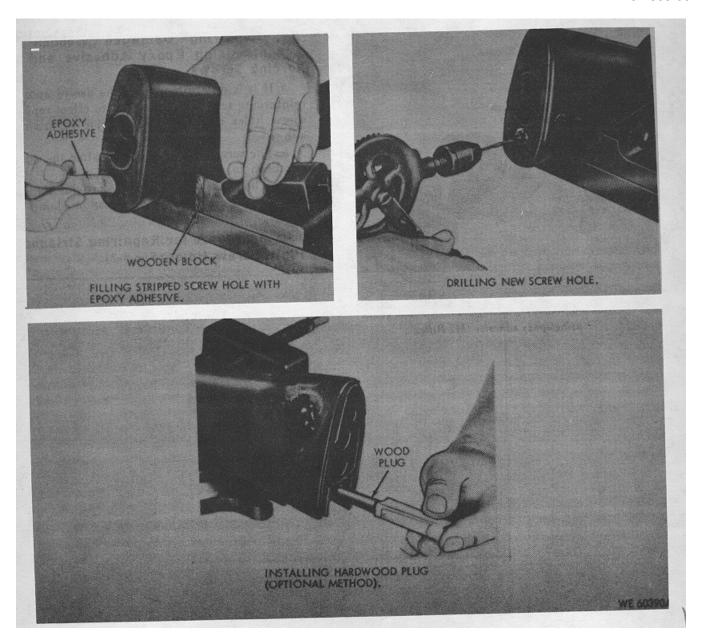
Repairing striped butt plate screw hole (M1, M2 Carbine, and M1, M14 Rifles).
